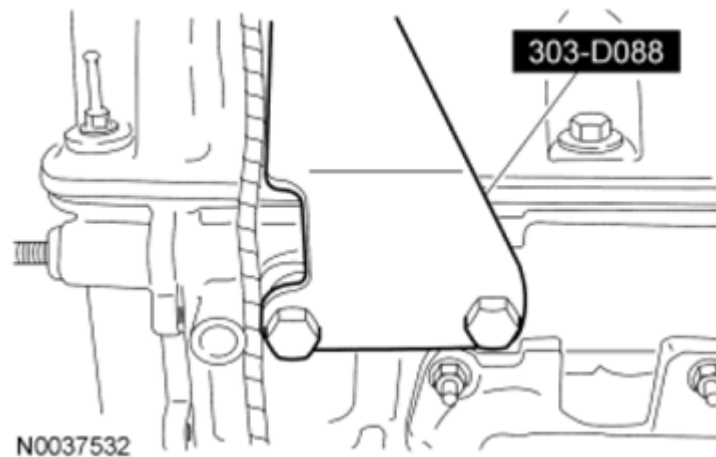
Installing Engine Lifting Bracket To LH Cylinder Head
